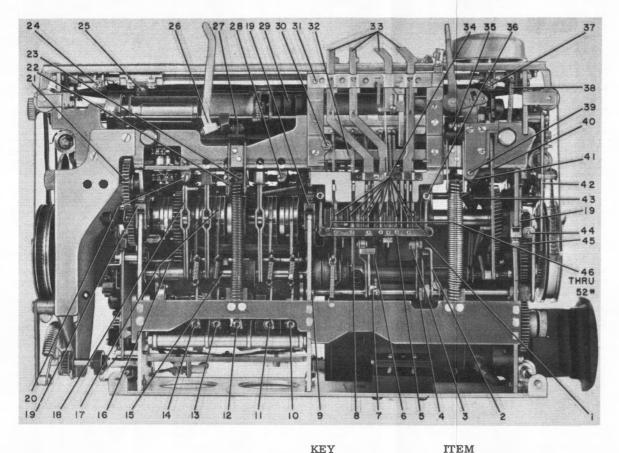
Printer Assembly, Top View (Ribbon Feed Top Plate Assembly Removed)
